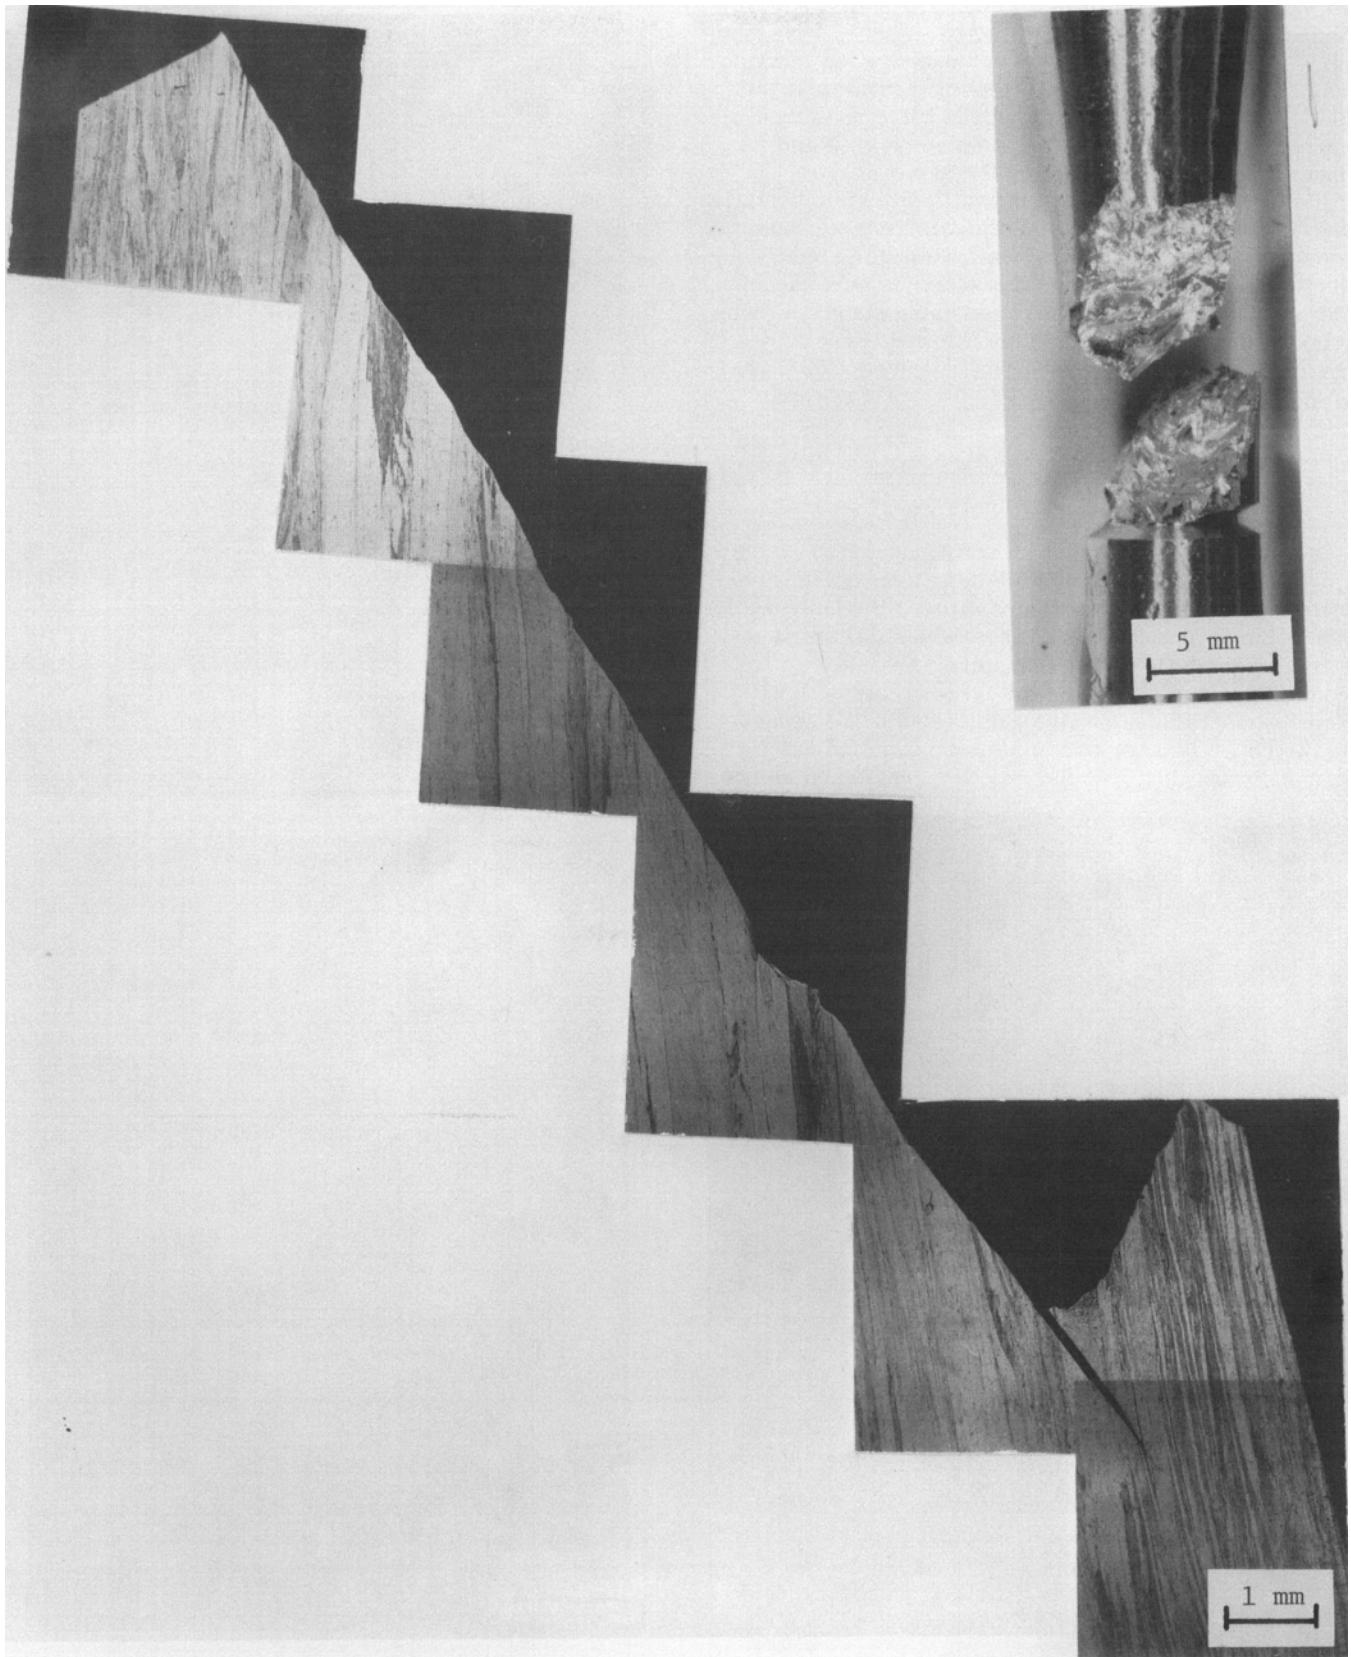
Fatigue initiation, propagation, and final overload fracture in a notched specimen as viewed in a cross-section through the center plane perpendicular to the planar fracture surface.
